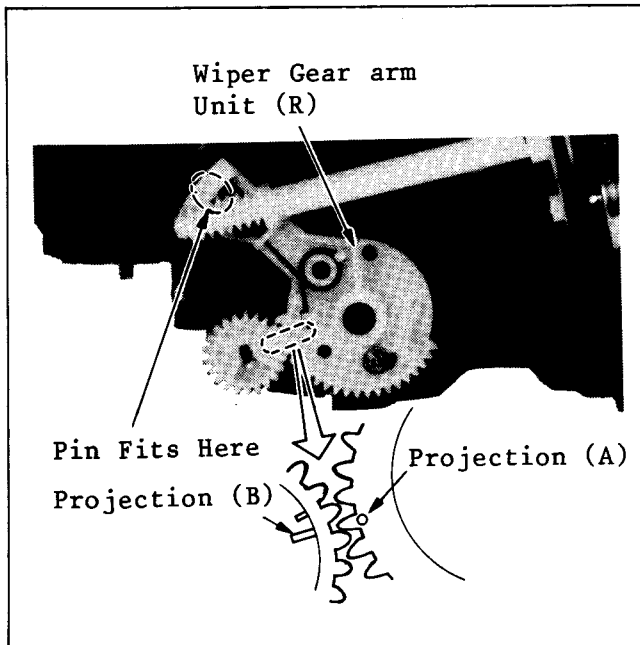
Adjustment of Cassette Up Gears-(3)
